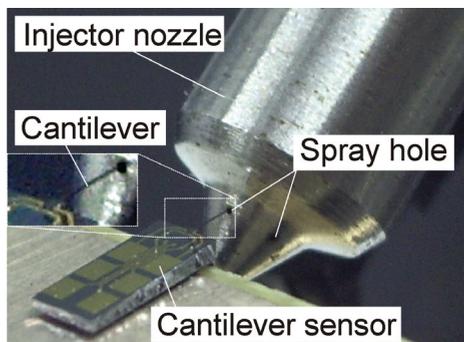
Optical micrographs of a VCO Diesel injector nozzle with a slender cantilever sensor probing inside a spray hole.
